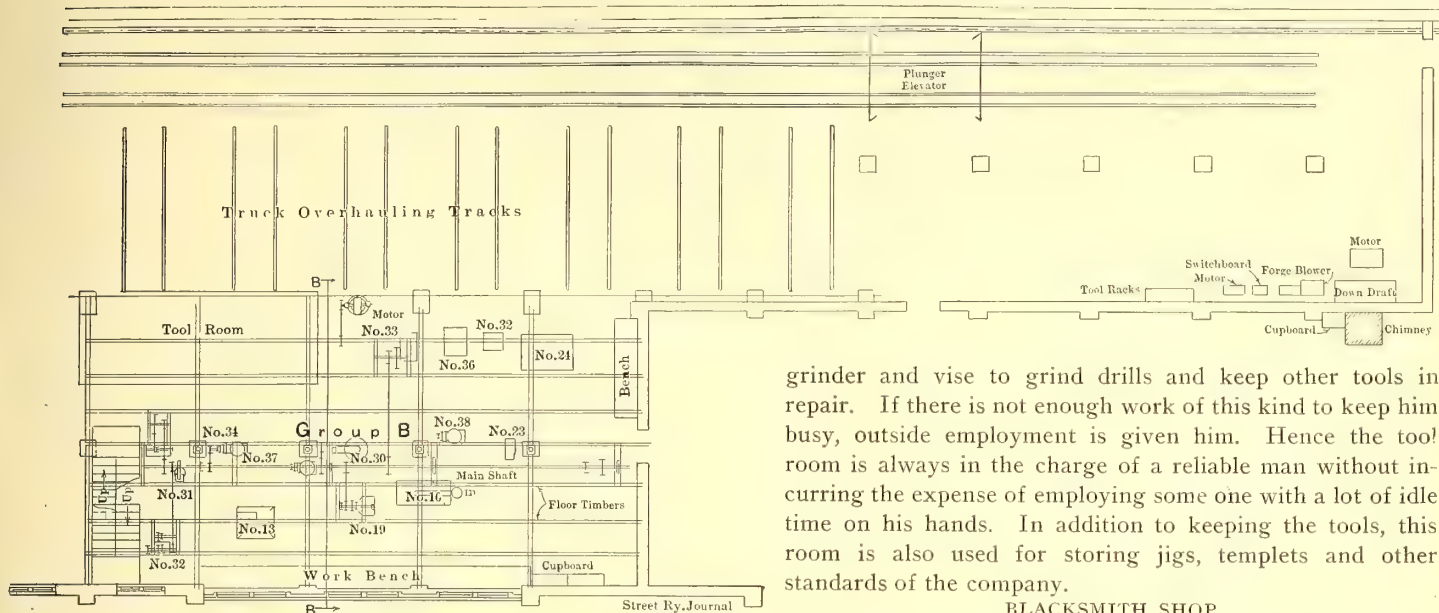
(CONTINUED).—PLAN OF SECOND PART OF MACHINE AND TRUCK OVERHAULING SHOPS, SHOWING GROUP-DRIVEN TOOLS, TRUCK-OVERHAULING TRACKS, ELEVATOR, TOOL ROOM, ETC.
